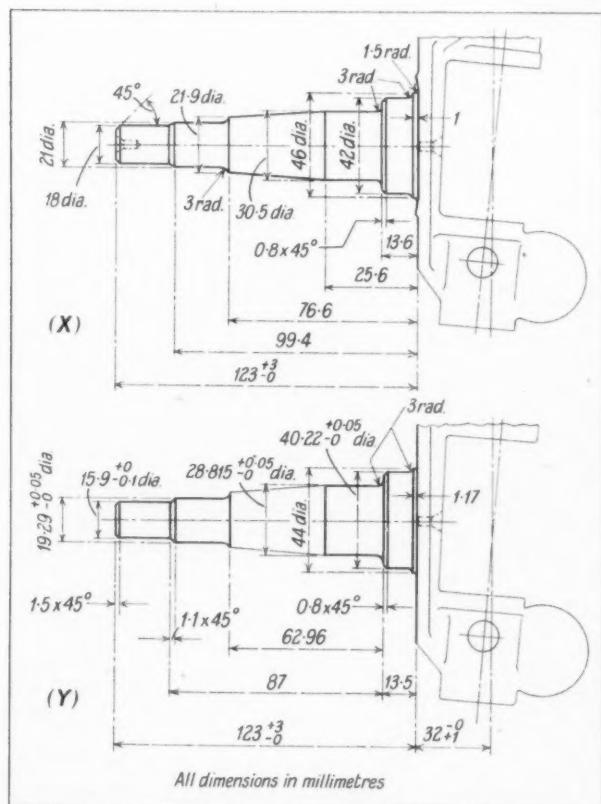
Sketches Showing the Dimensions and Tolerances to which the Components are Machined on the First (view X) and Second (view Y) + GF + Copy-turning Lathes
